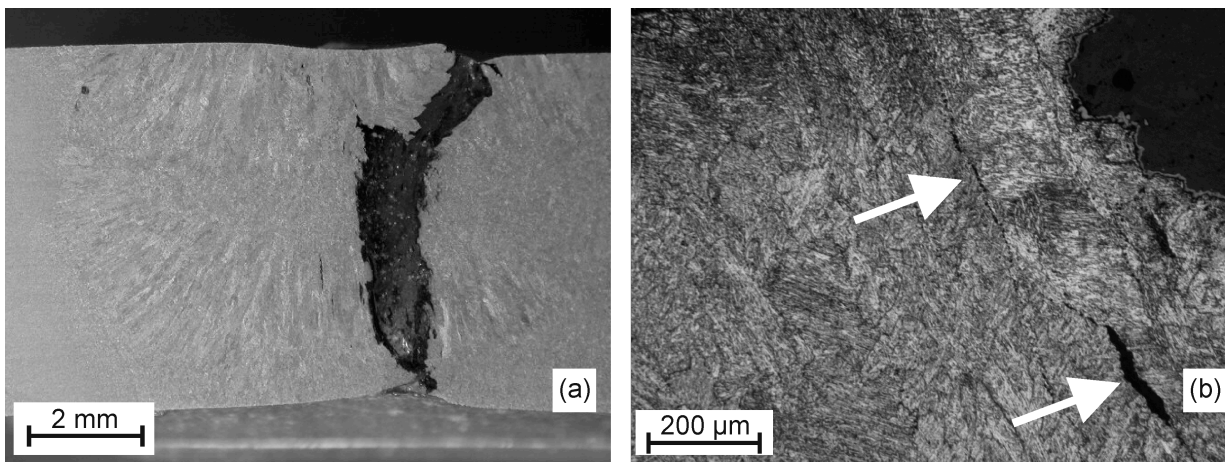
Optical micrographs of a weld metal failure in the under-matching weld specimen tested at 600°C (873K), 120 MPa (UM120) for 8,869 hours revealing fracture and secondary cracking along the columnar grains of solidified weld metal.
